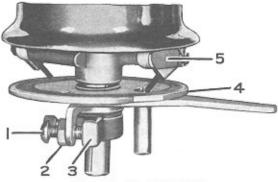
No. 11540-A Tone Arm Base Assembly (Lower View)
